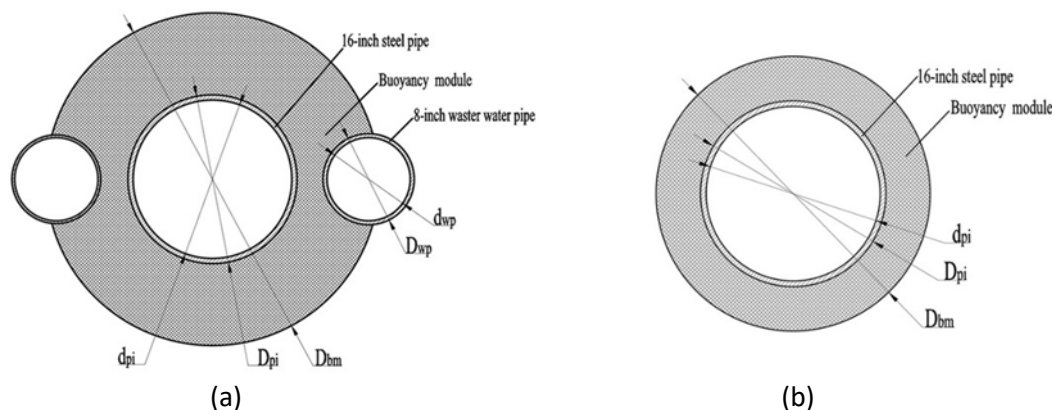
(a) Cross-sectional view of a riser featuring integrated return pipes and a buoyancy module; (b) Cross-sectional view of a riser equipped solely with a buoyancy module.
